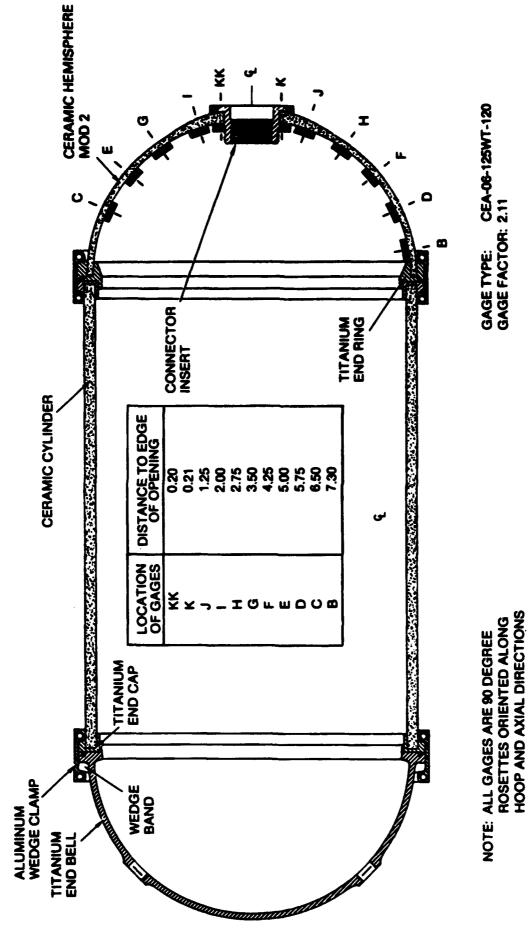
Location of strain gages on ceramic test assembly 2B.
